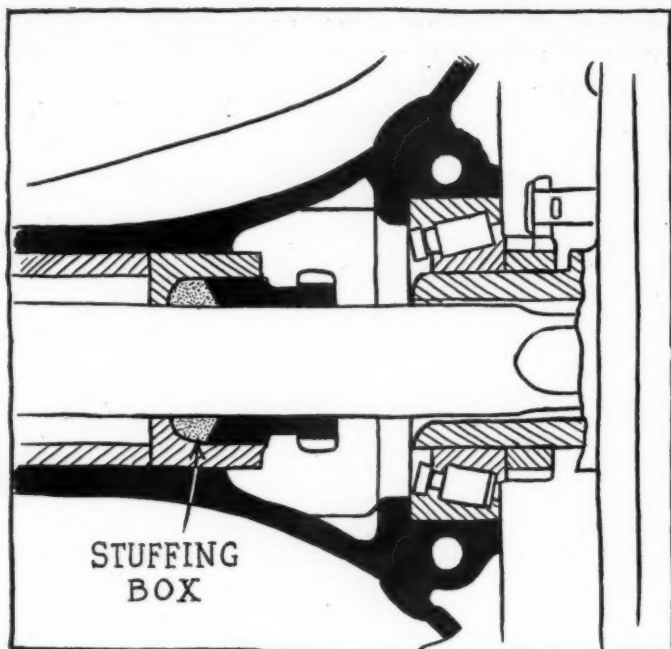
Installation of felt or hemp packing box at inner end of drive axle
